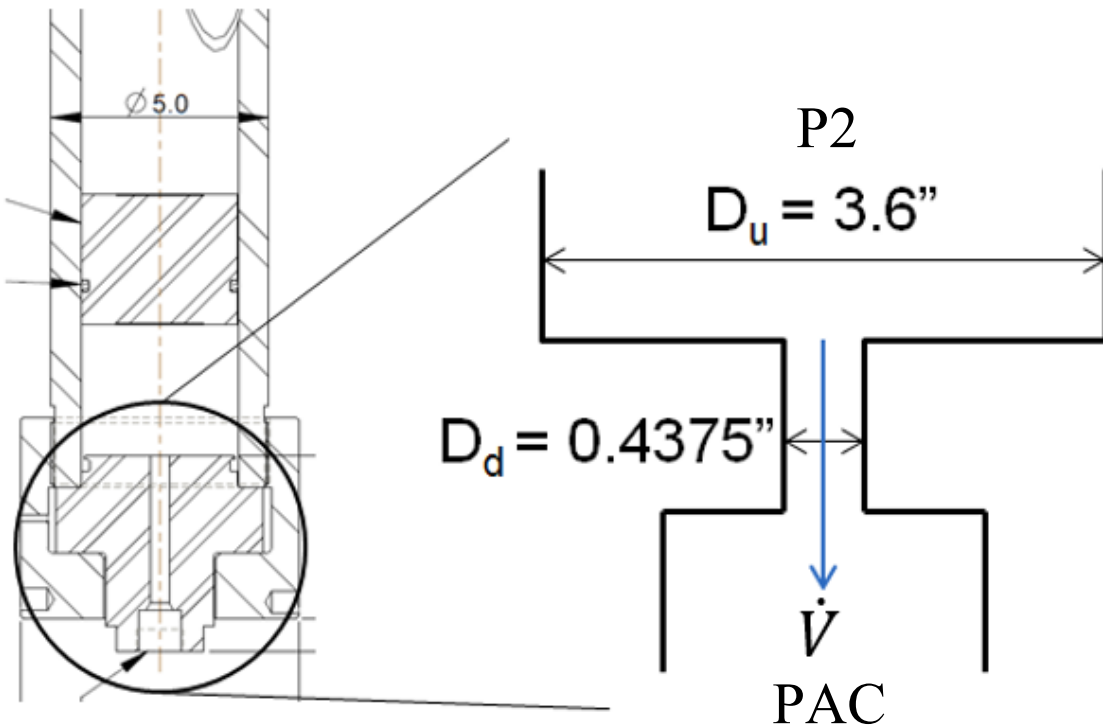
Cross-section of end cap geometry for high-pressure cylinder.
